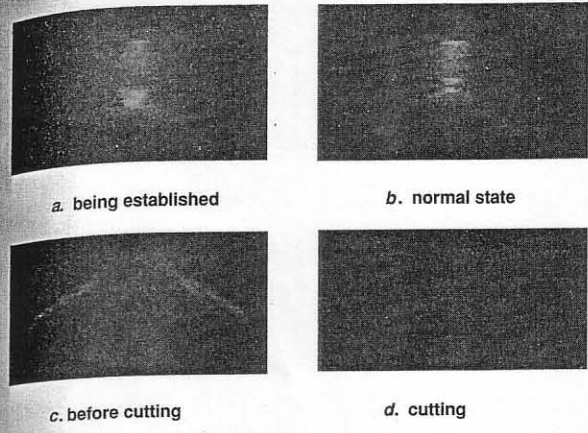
Images of the nominal keyhole weld pool with varied welding current
